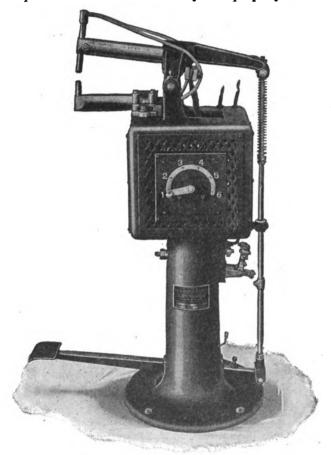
Foot-Operated Spot Welder for Sheet Metal Courtesy of Winfield Electric Welding Machine Company
